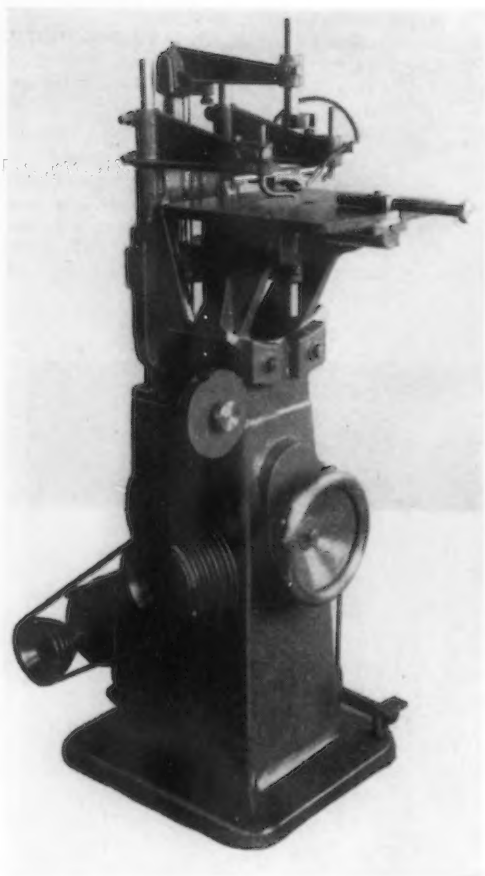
High-speed, heavy-duty die filing machines that are flexible and practically universal, and that are capable of both filing and sawing, are obtainable. (Photo by courtesy Oliver Instrument Co.)
